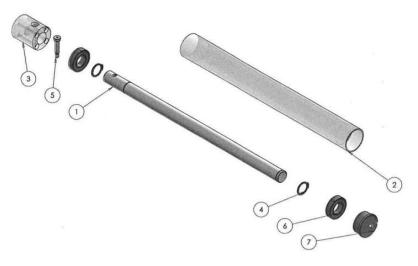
Roller Assembly Exploded View – Dynamic Portion (Gallarus Industry Solutions A01 Roller Mount)
